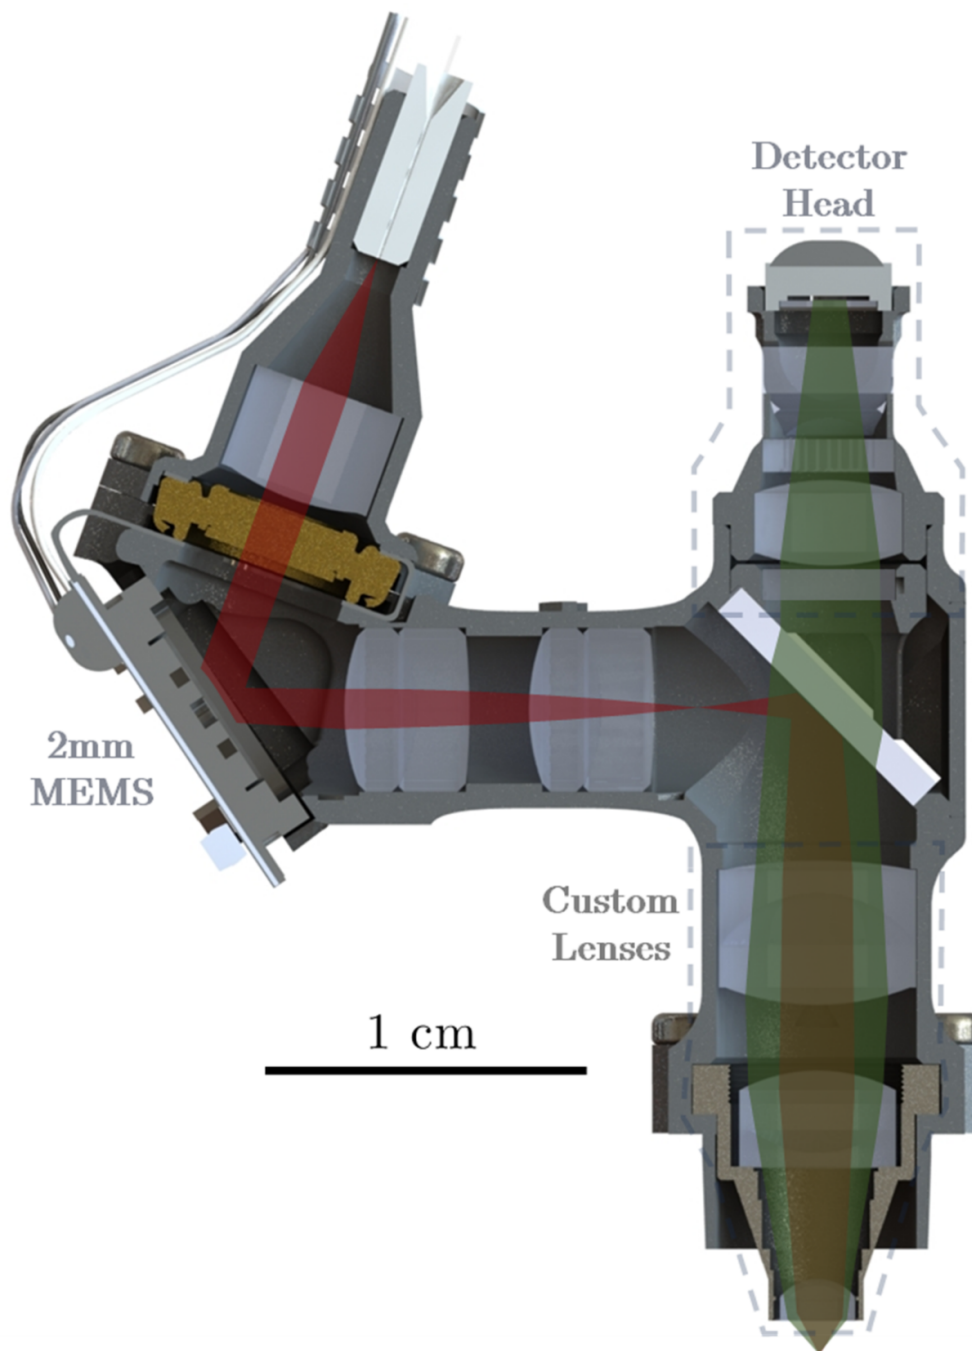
UCLA 2P Miniscope Optomechanical Drawing
